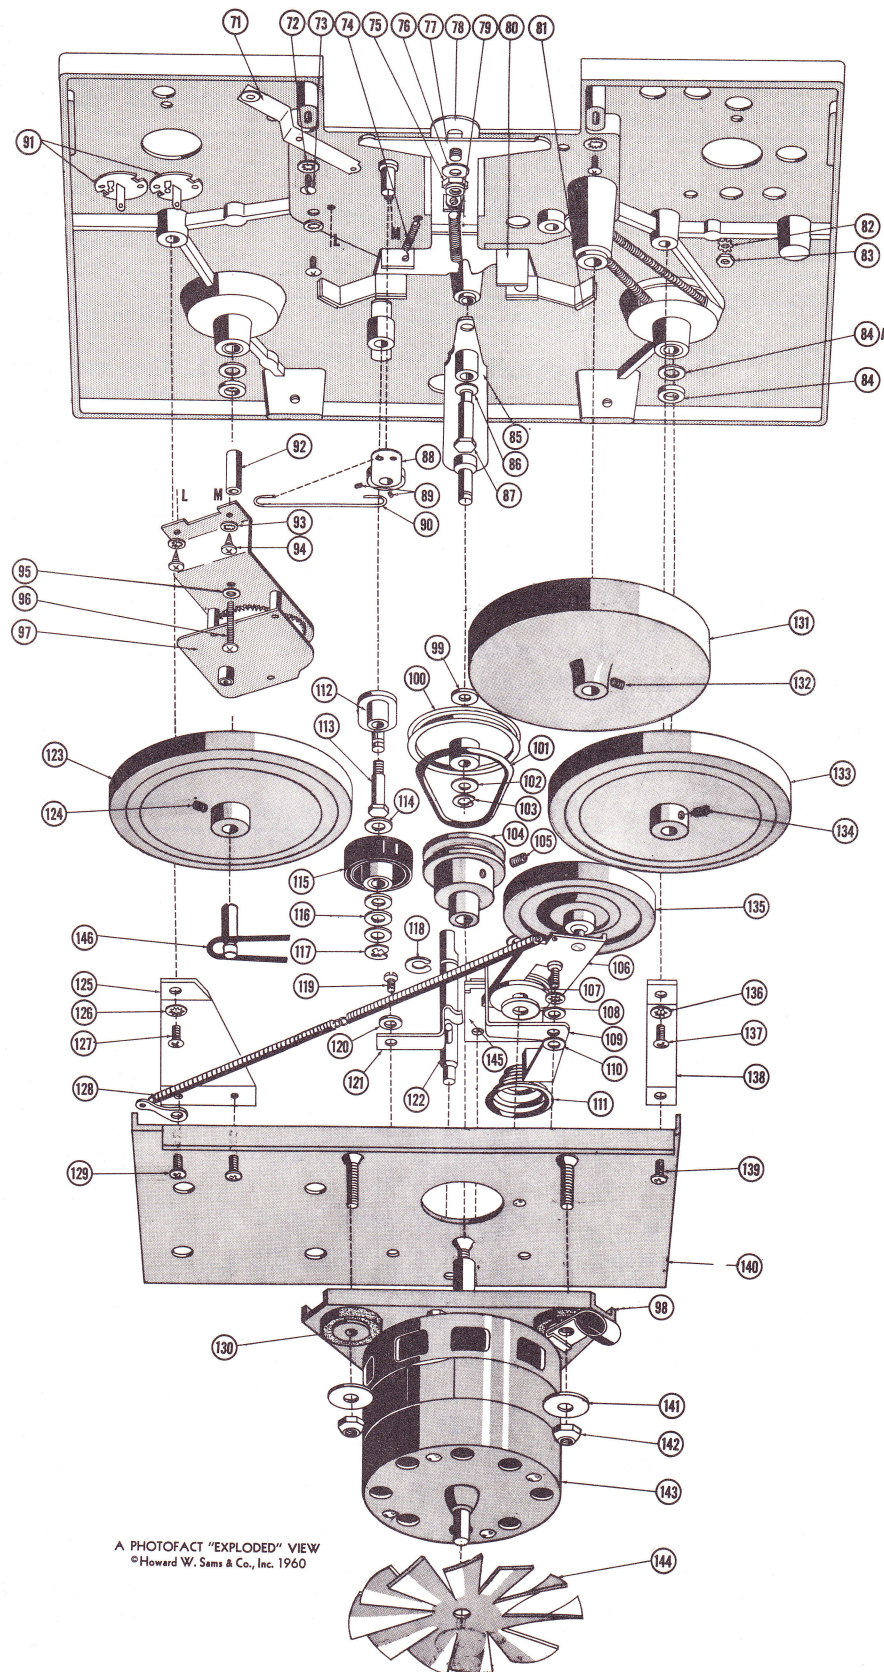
A EXPLODED VIEW OF PARTS ABOVE BASEPLATE
